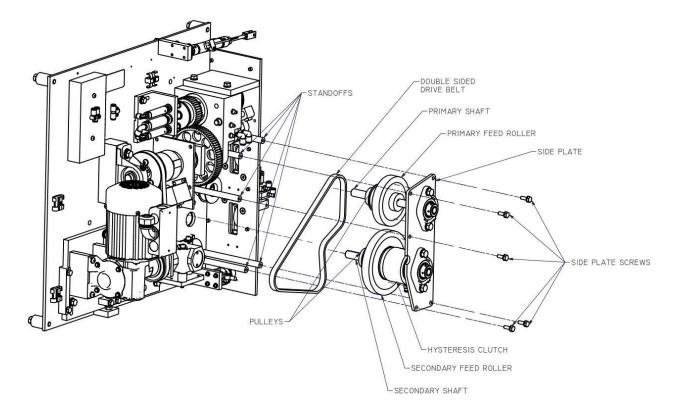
Exploded View of Rollers, Clutch, Belt, and Shafts
